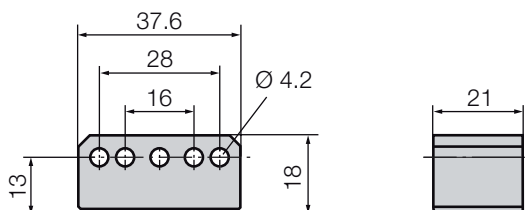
Installation dimensions for BTL6-A-3801-2
